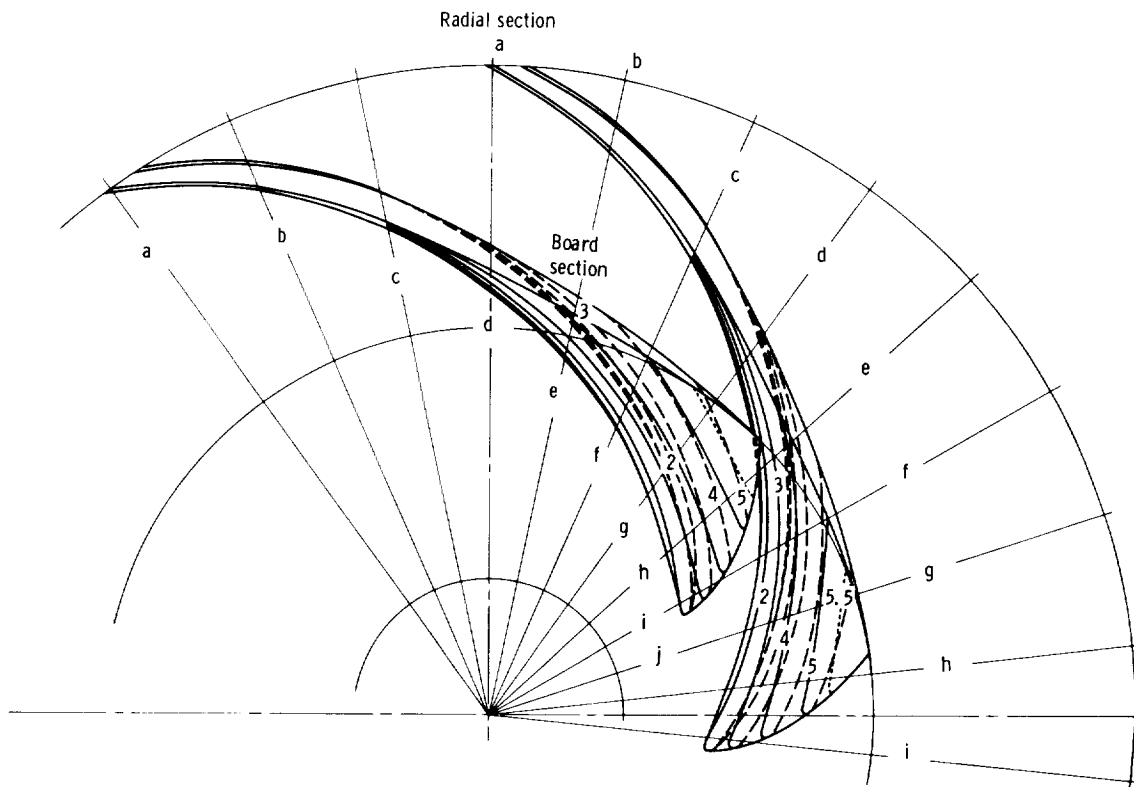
Vane layout with board sections of Francis pump rotor.
